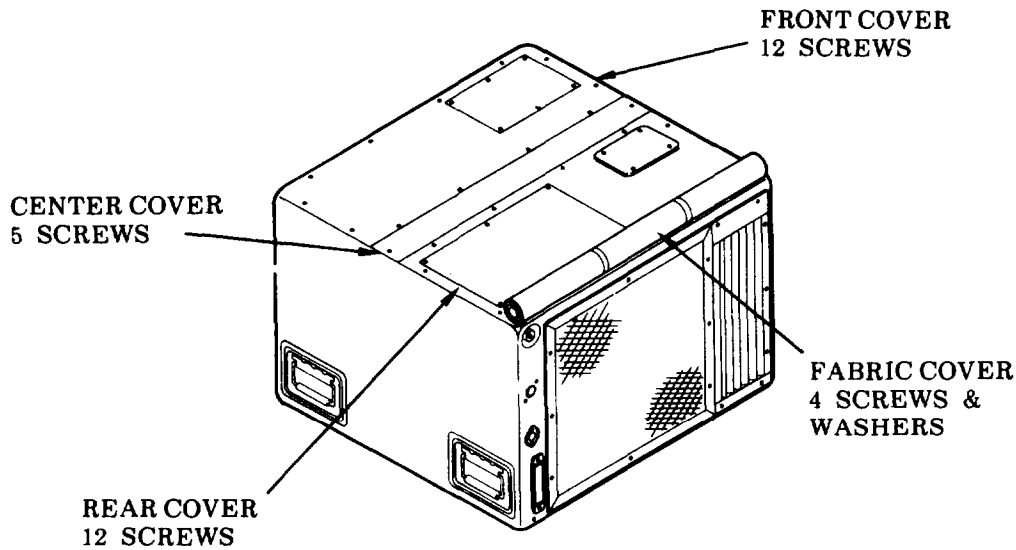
Top covers and condenser fabric cover removal and installation.
